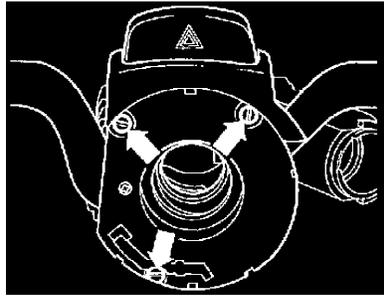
Turn signal switch -E2- and windshield wiper/washer switch -E22-, removing
